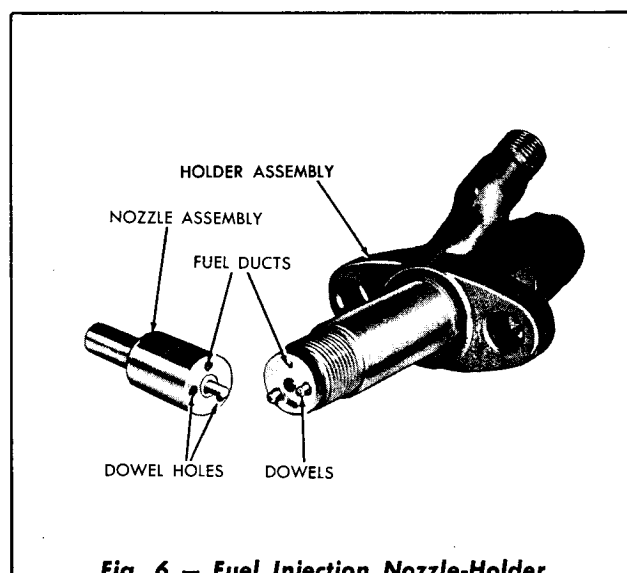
Fuel Injection Nozzle-Holder Assembly — Dowel Location
